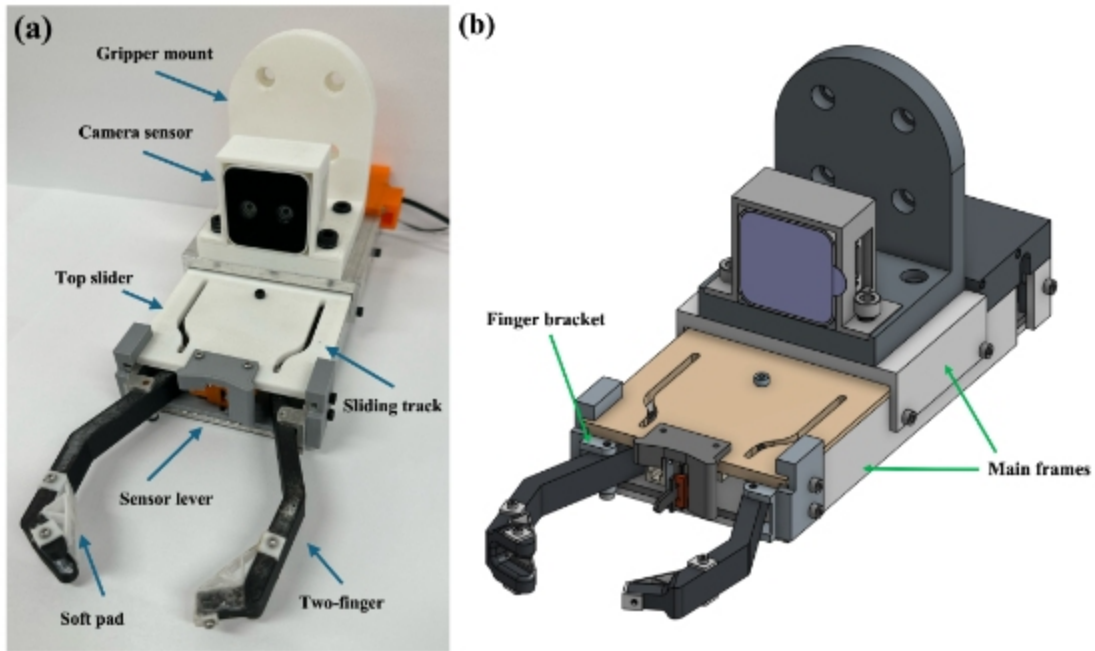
Gripper Design: (a) Hardware (b) CAD design
